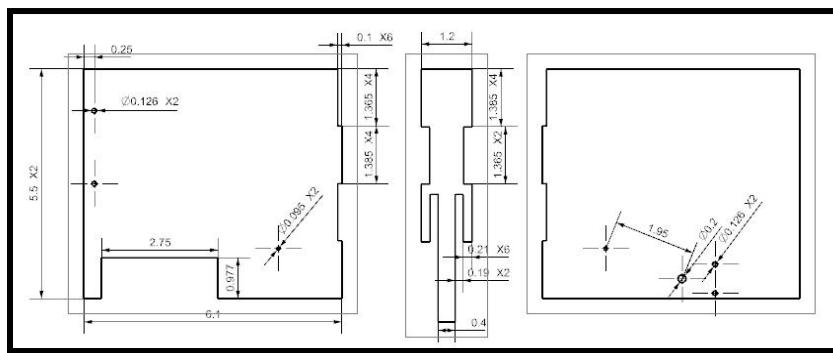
CAD Drawing of Dispenser Side Walls
